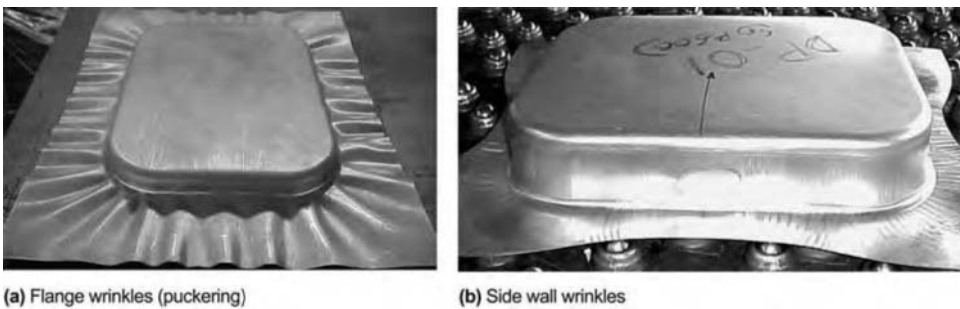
Wrinkles that may occur in deep drawing rectangular cups when blank holder force is too low: (a) flange wrinkles, (b) side wall wrinkles
